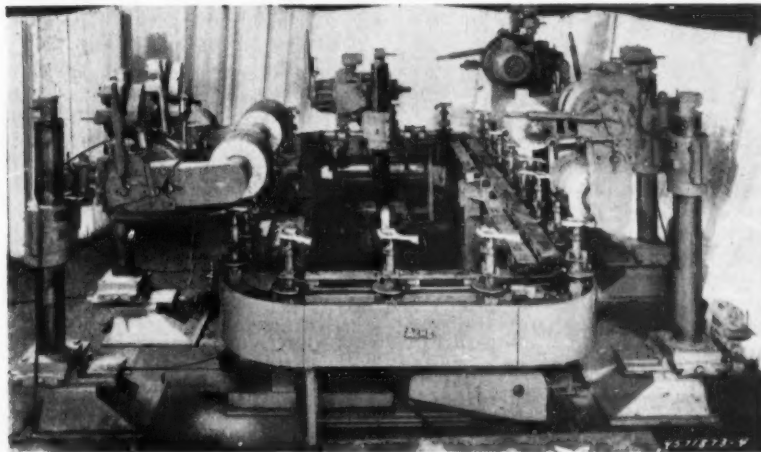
Universal-type machine for polishing tail lamp bezels.
